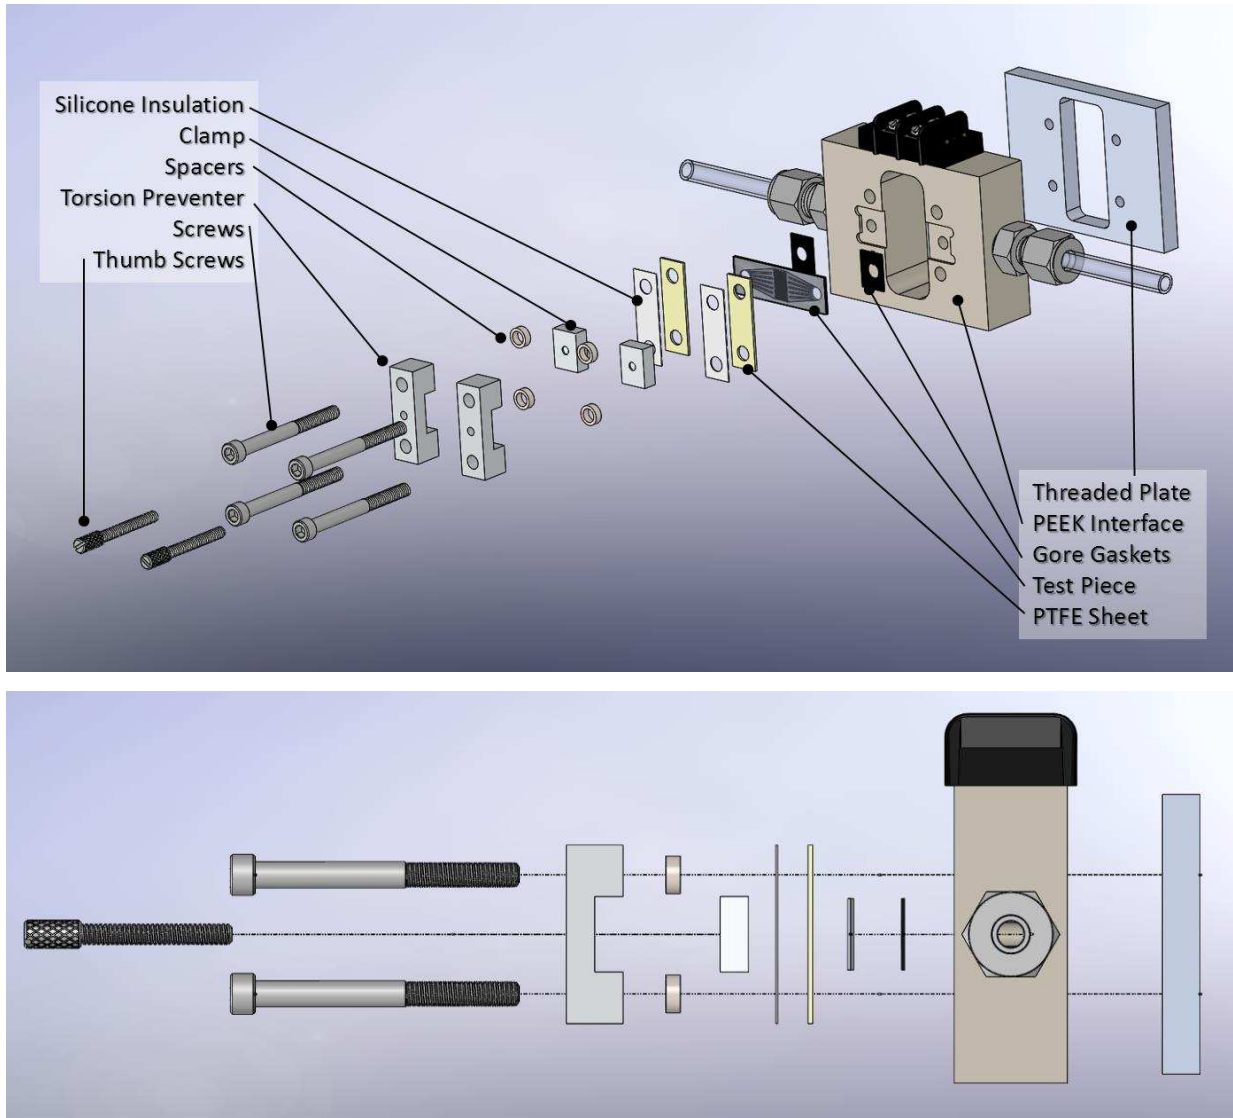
Top: exploded view of fluidic sealing mechanism (electrical harness omitted for clarity); Bottom: side view of assembly
